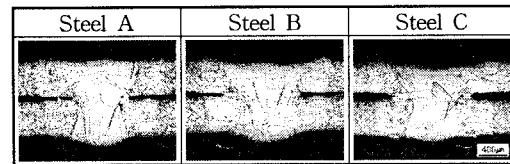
Weld cross-section of Al coated steels(without surface pre-treatment)
